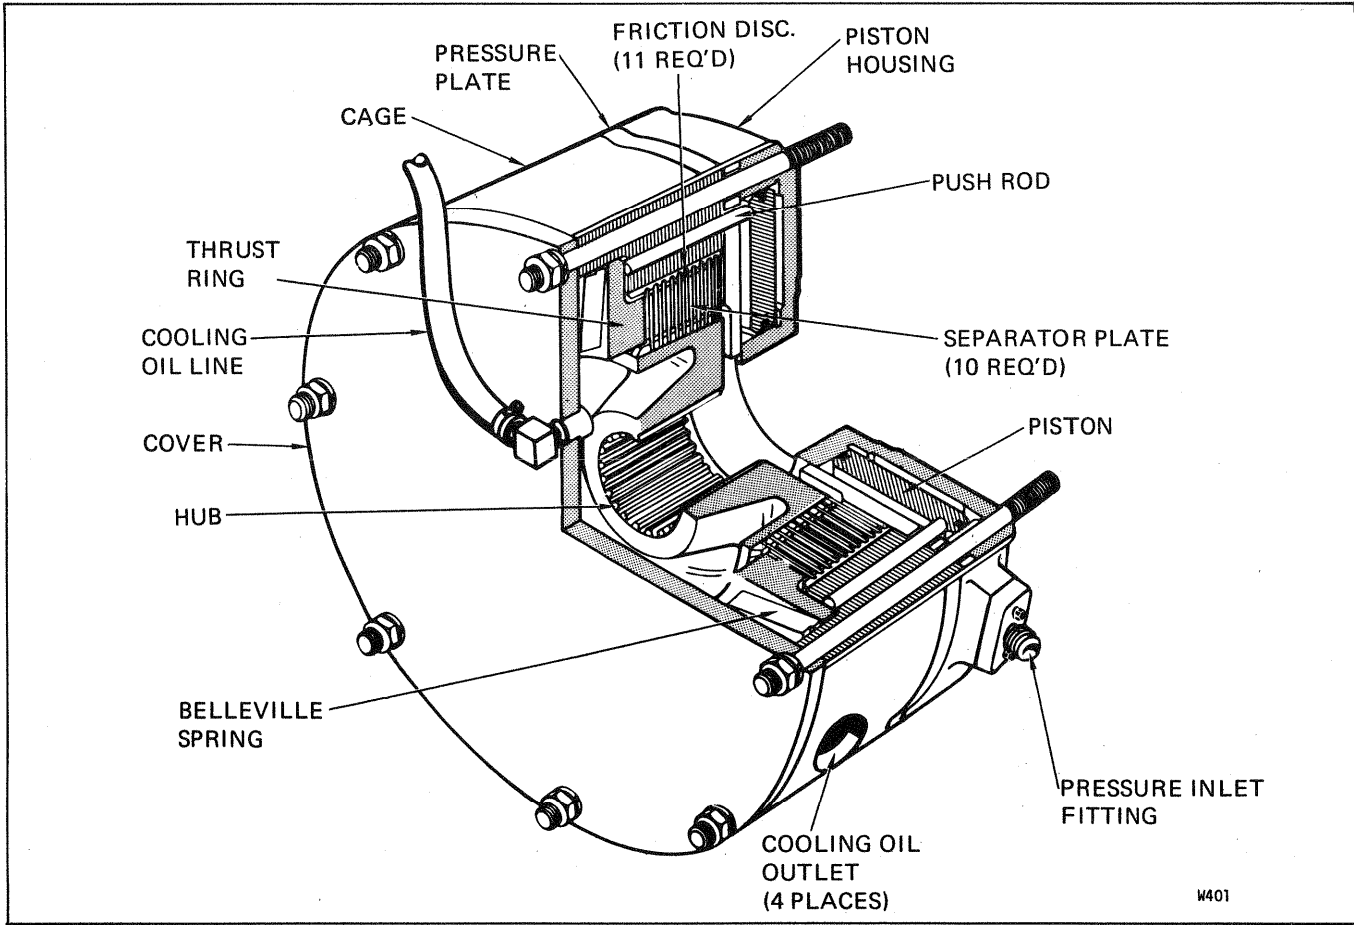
POWER CONTROLLED OIL BRAKE ASSEMBLY
